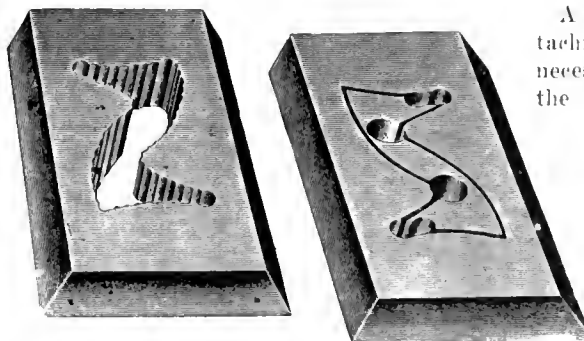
SHOWING DIFFERENCE IN WORK DUE TO USE OF SAWING ATTACHMENT FOR DIE MAKING.
